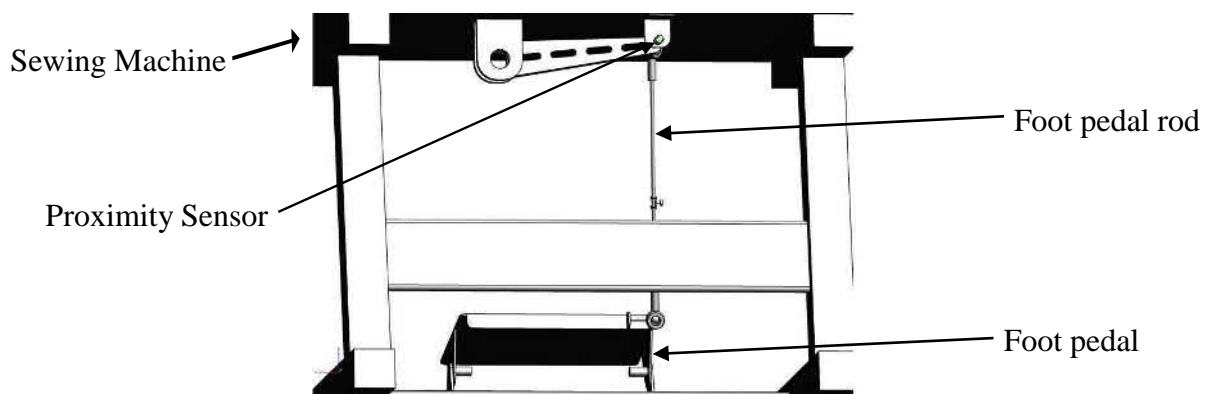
Mounting the inductive proximity sensor on the sewing machine
